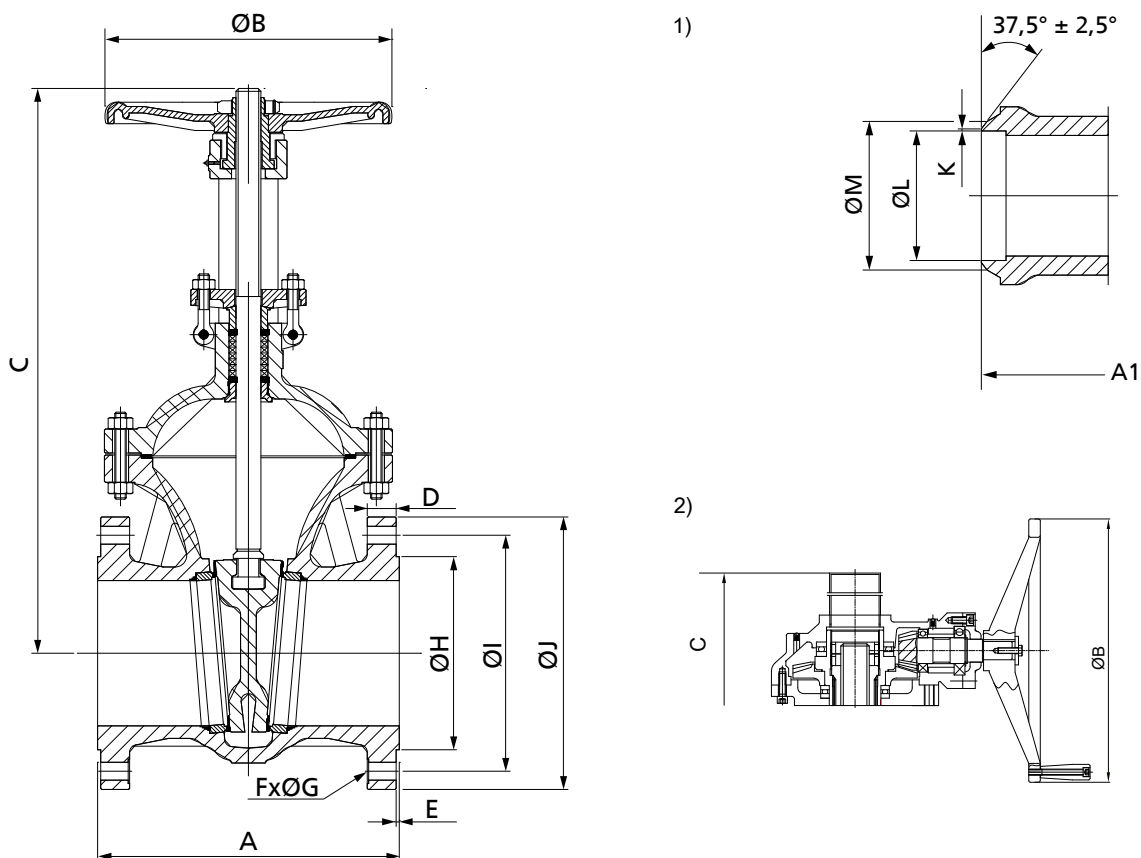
Sectional drawings; 1) Butt weld ends; 2) Actuator
